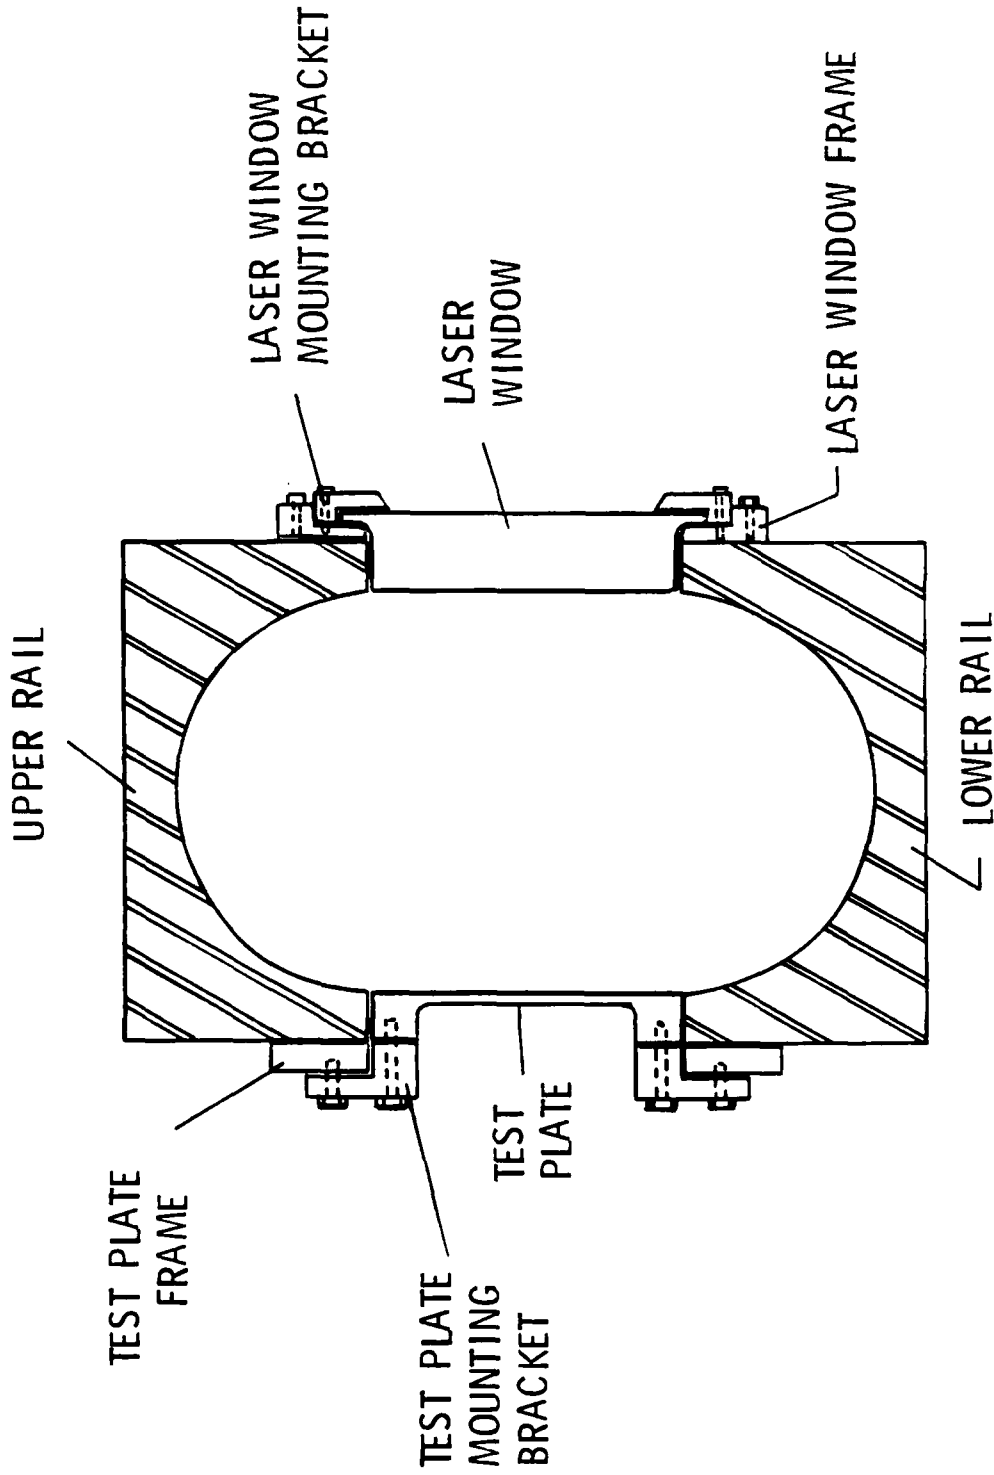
CROSS SECTION OF NEW BLRF TEST SECTION
